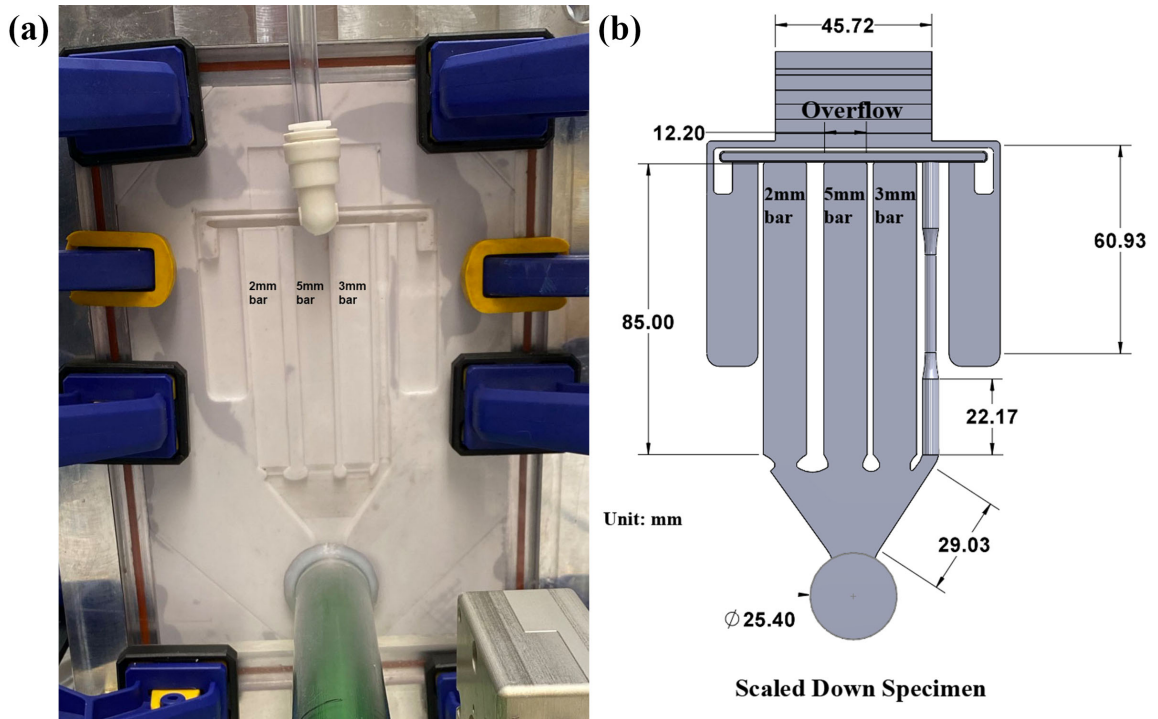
The scaled down test specimen die is shown as follows: (a) displaying the 3-D printed die within its holder, and (b) presenting the die with major dimensions labeled.
